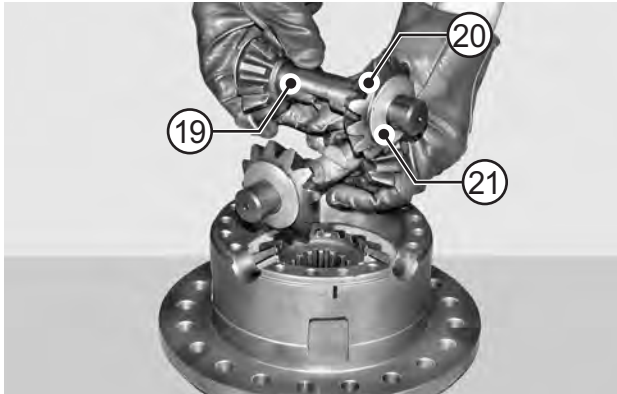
Install the planetary gears (20) and spherical shoulder washers (21) onto the shafts (19). Install the assemblies in the half-box (7).
